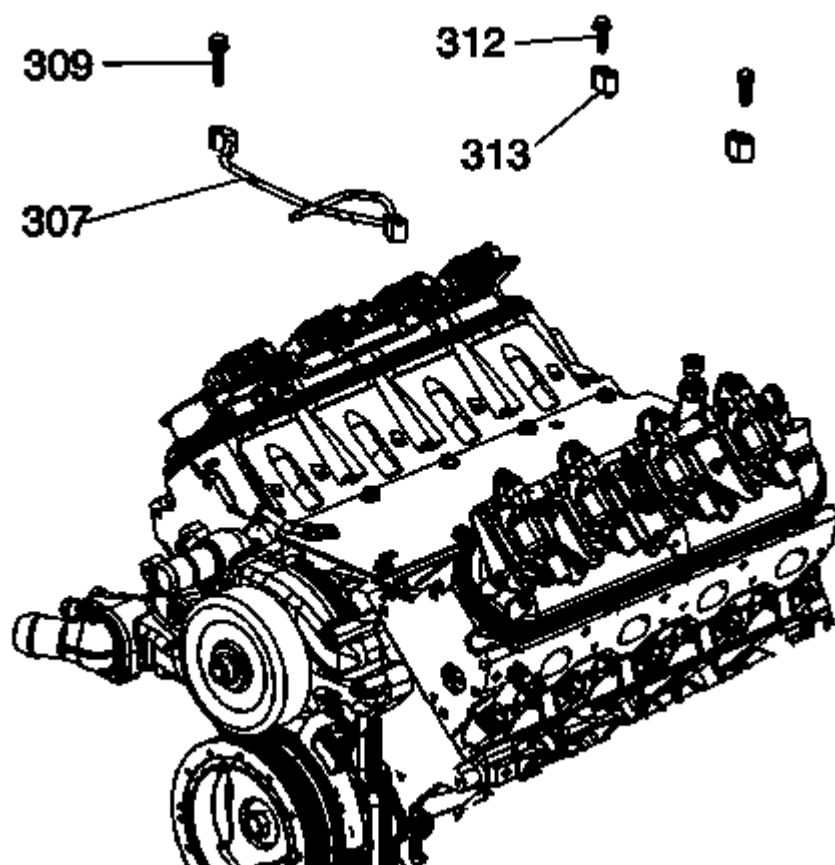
Coolant Air Bleed Pipe, Cover & Bolts
